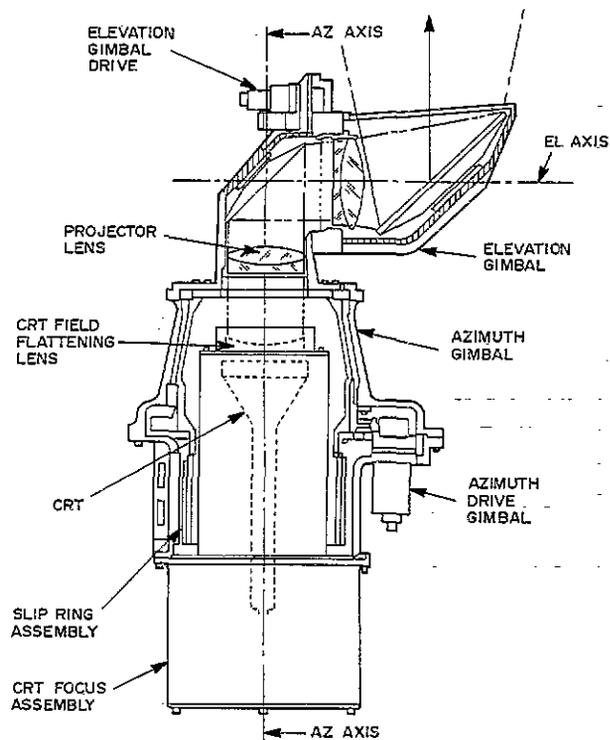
Outline Drawing of Projector Head Showing Typical Steering Optics
